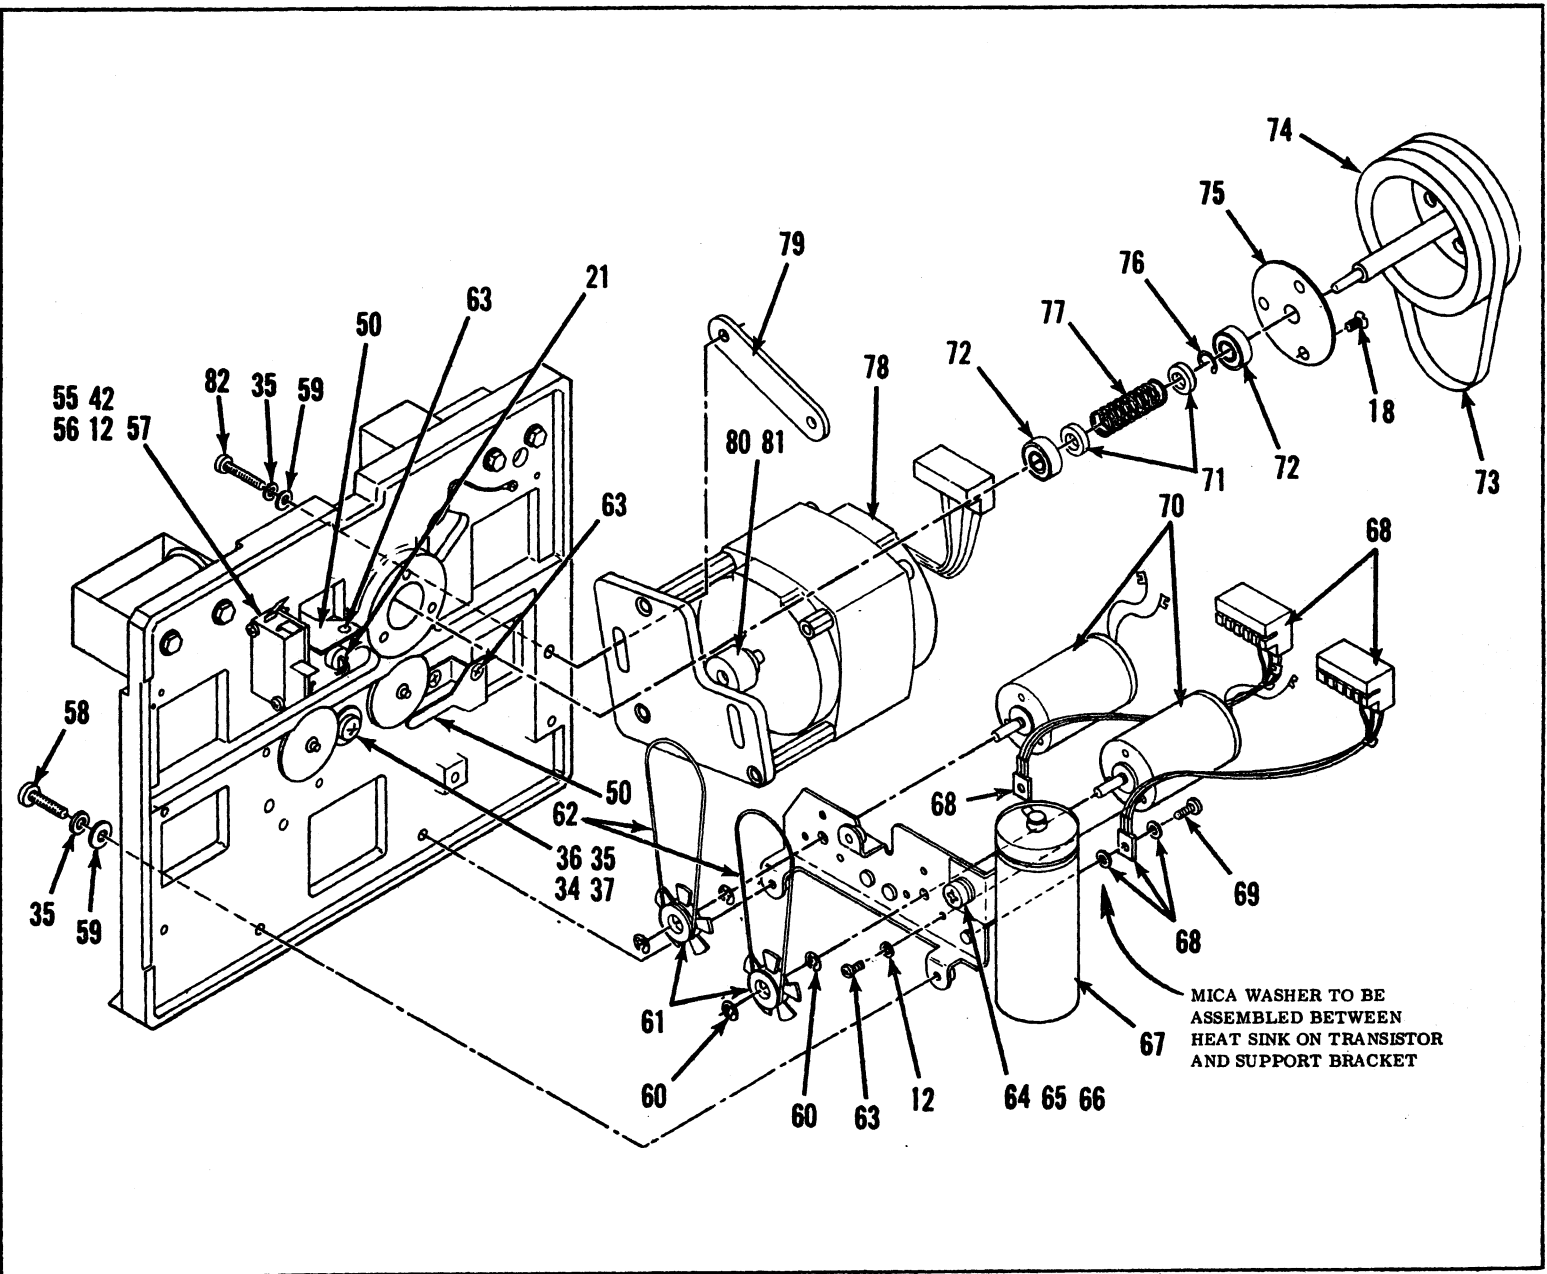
EXPLODED REAR VIEW OF TT120 TRANSPORT
